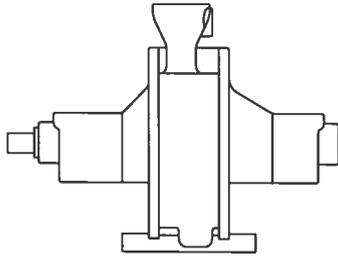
Pump type RT3: Between-bearing, flexibly coupled, side channel design
